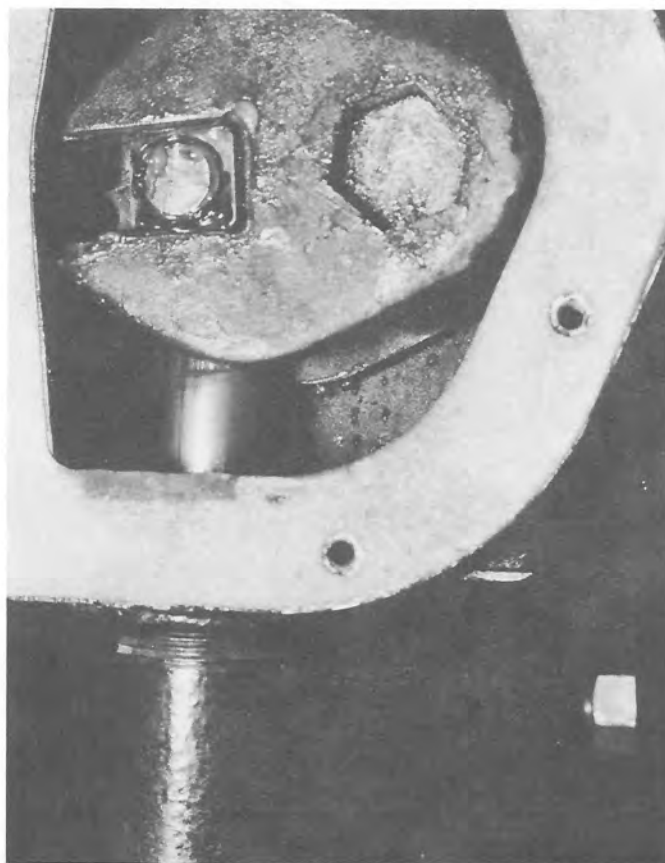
D. Shaft seal leak developed from wear due to a metal shaving which was not removed during assembly. Leak occurred only when valve was in an intermediate position. Photo P801-D-74506
